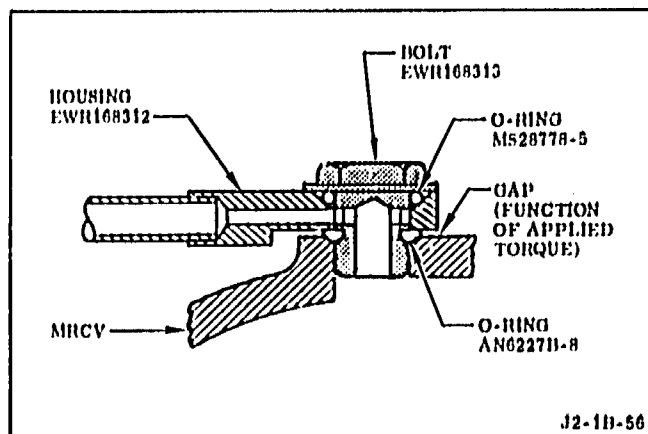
A. MRCV and GG Valve Drying and Leak Test Kit EWR230094
